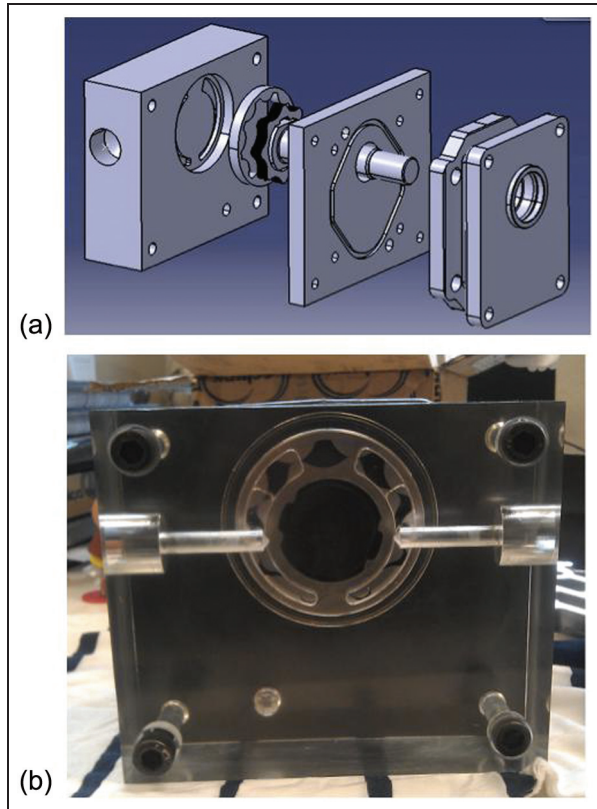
Modification of gerotor pump for the test bench: (a) 3D design and (b) assembly.
